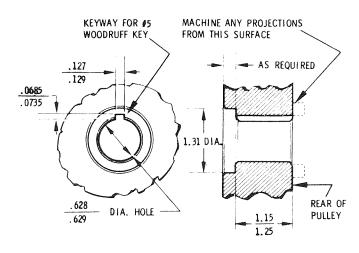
PULLEY DIMENSIONAL DETAIL
